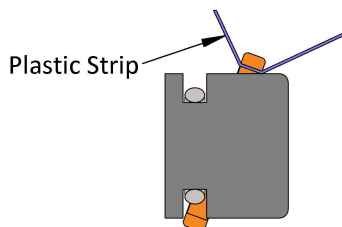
After o-ring is installed into seal groove, stretch the PTFE seal over the piston into the groove using a plastic strip.
